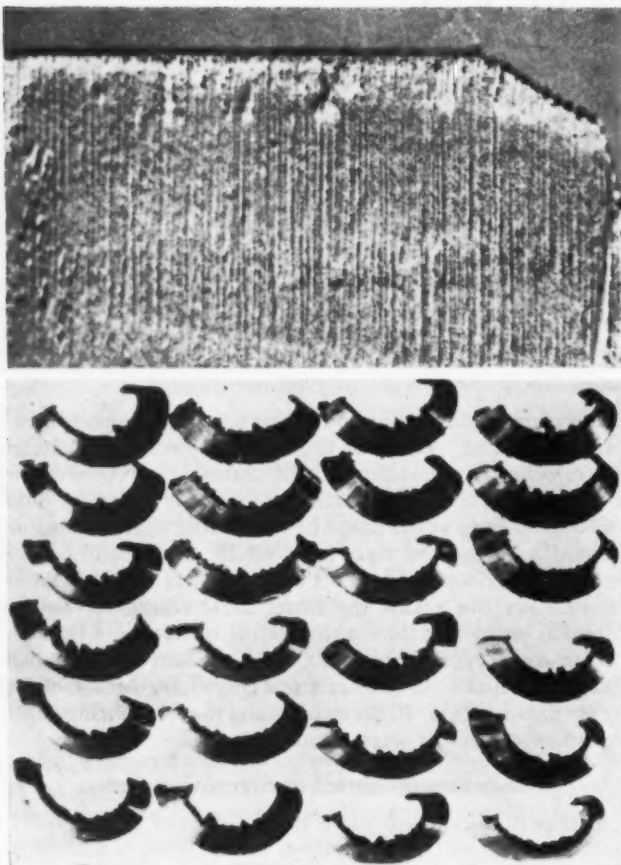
CUTTING EDGE AND CHIPS FORMED AT 130 FPM
